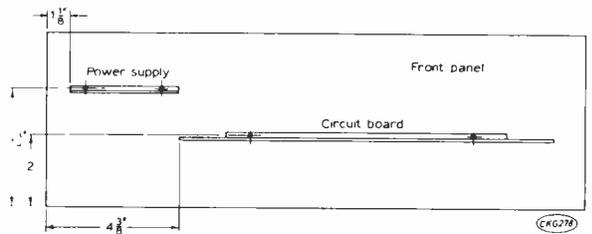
(above): Rear view of the front panel showing the siting of the circuit boards.
